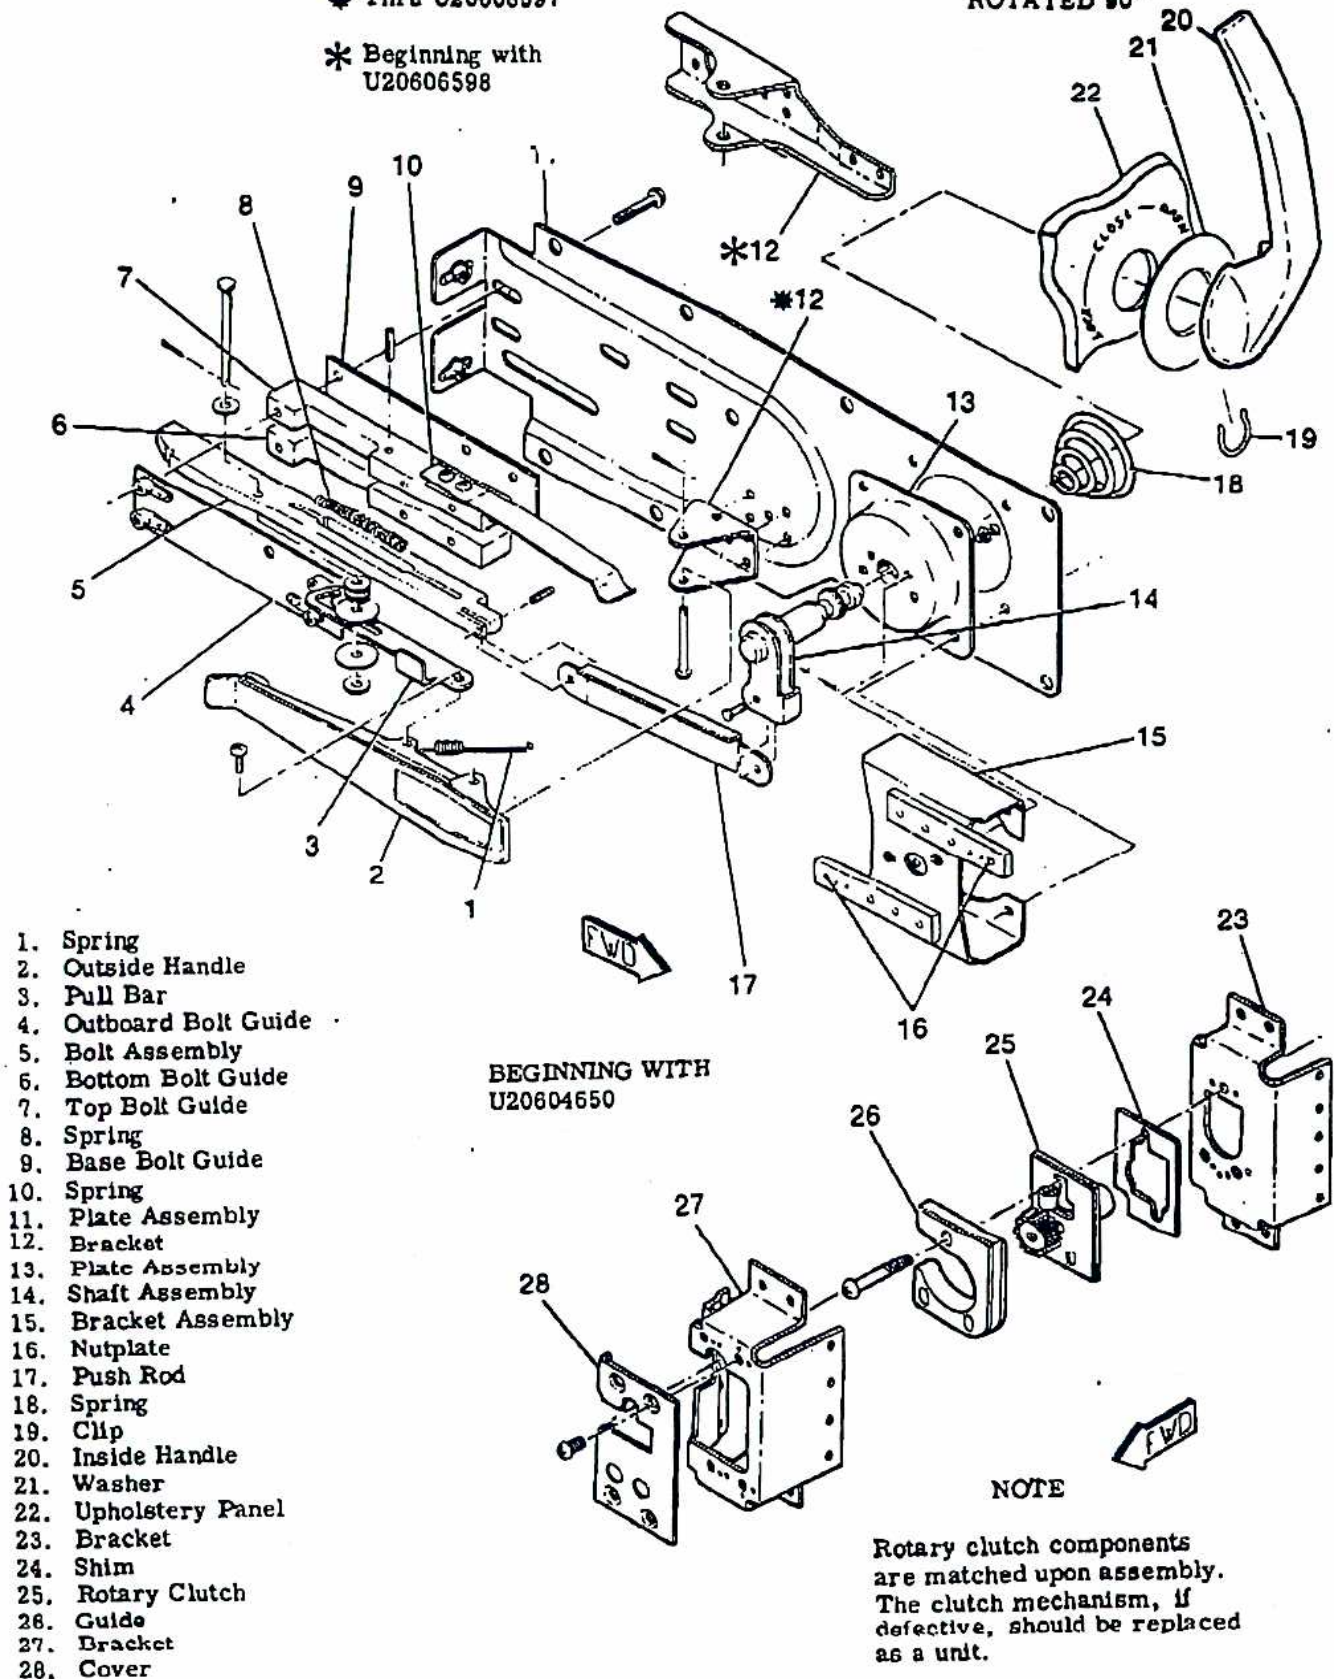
Cargo Door Latch Installation (Sheet 2 of 2)
